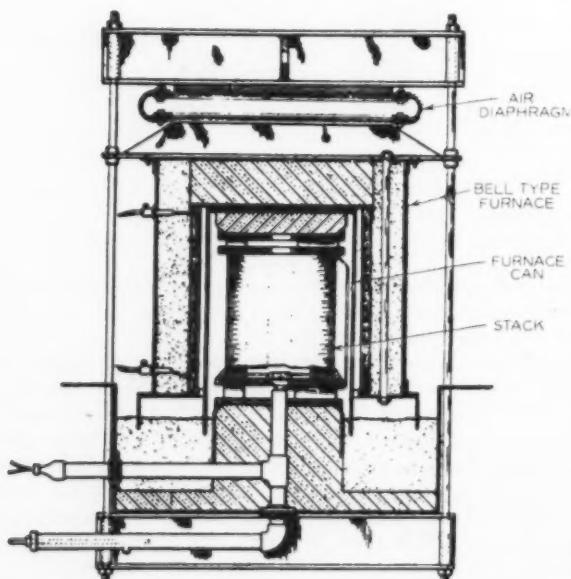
CROSS-SECTIONAL VIEW OF SINTERING FURNACE SHOWING ARRANGEMENT OF STACKED DISKS WITH BELL-TYPE HEATING UNIT IN PLACE TO APPLY DOWNWARD PRESSURE TO STACK WHILE HEATING THE WORK
